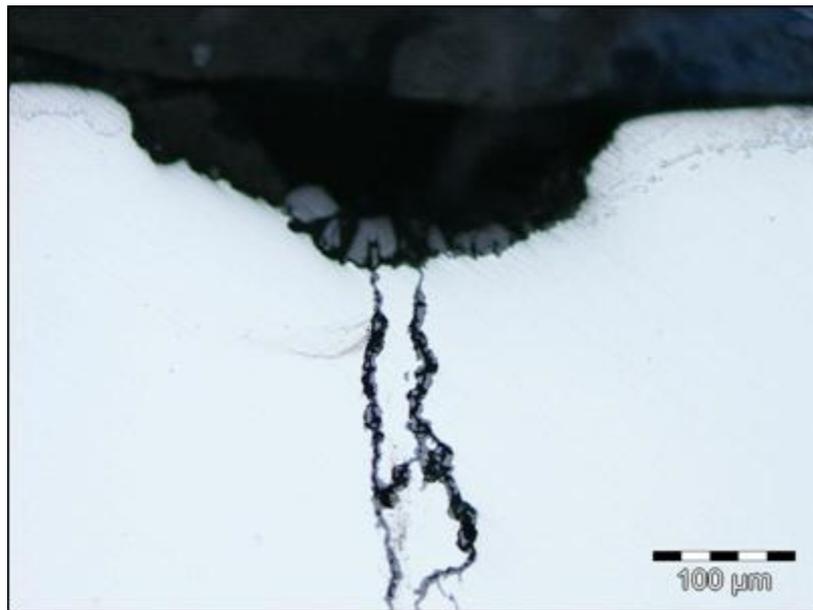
Corrosion induced stress cracks propagating from corrosion pits in cooling channels to the tool surface
